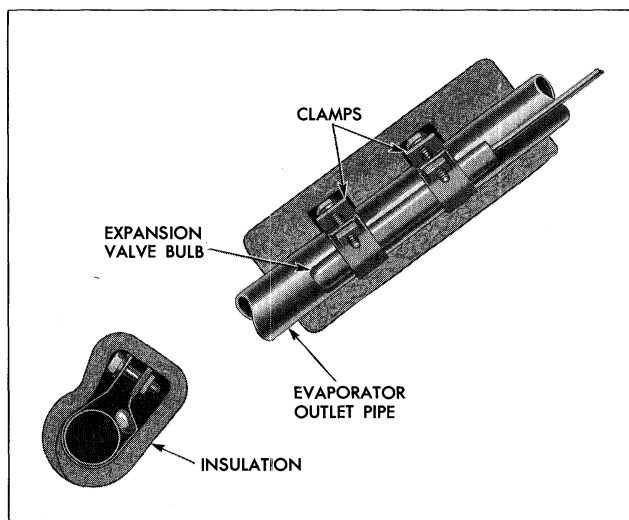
Expansion Valve Bulb at Evaporator Outlet Pipe
